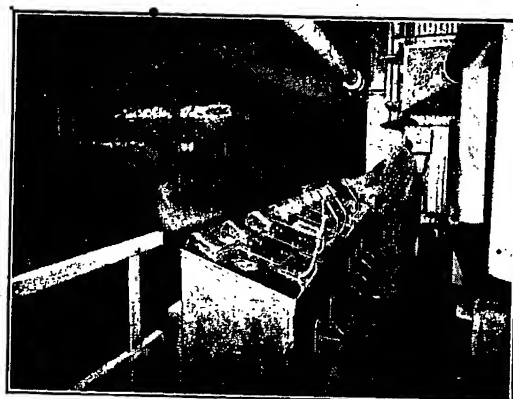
CONTROL PULPIT, HOT STRIP MILL
